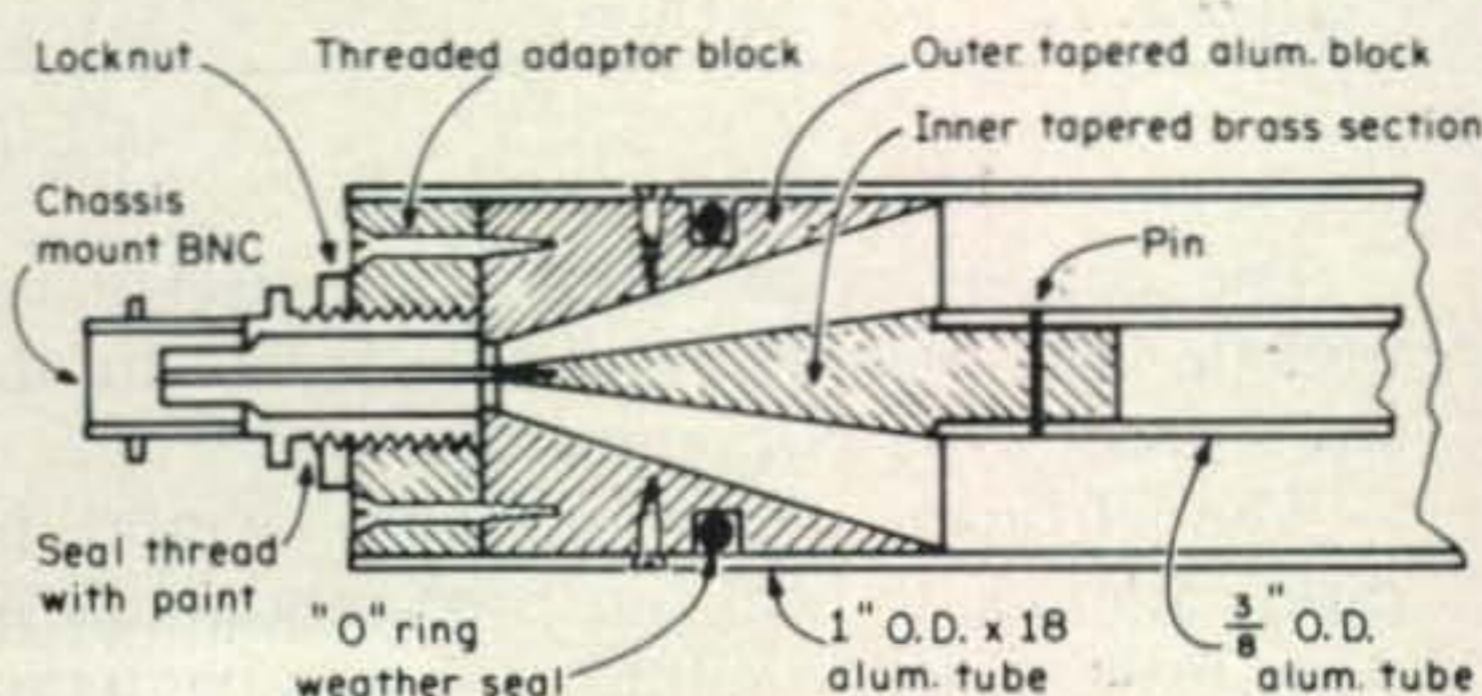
A BNC threaded chassis mounting connector may also be used with aluminum coax as shown above.
